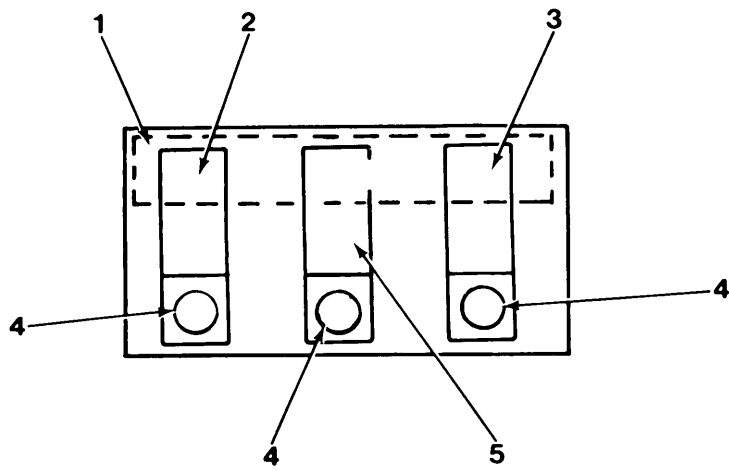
A13 Electronic Component Assembly (Sheet 2 of 2)
